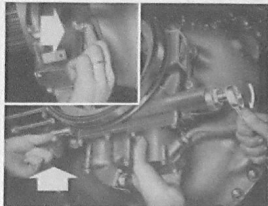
Tightening Spring Compression Bolt and Depressing Calibrating Pin
